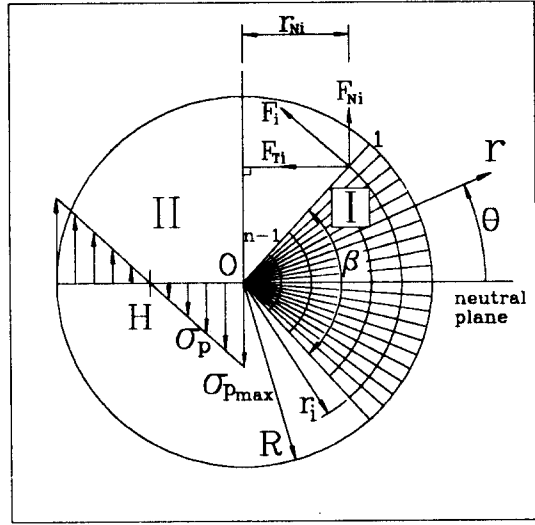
Analysis of the tensile stress in a rotary forged workpiece.
